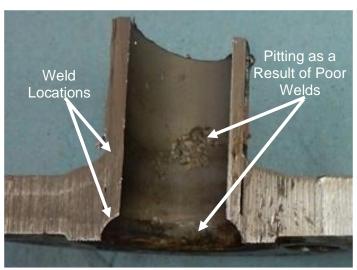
Welding defects (too short of an interpass time) resulting in stainless steel sensitization enabling intergranular corrosion and through thickness pitting of a pipe welded to a flange.
